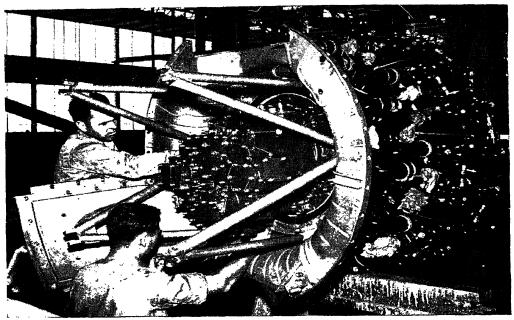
Attaching a chrome-moly welded-steel-tube motor mount to a twinrow radial engine before installation in a Lockheed Ventura.
